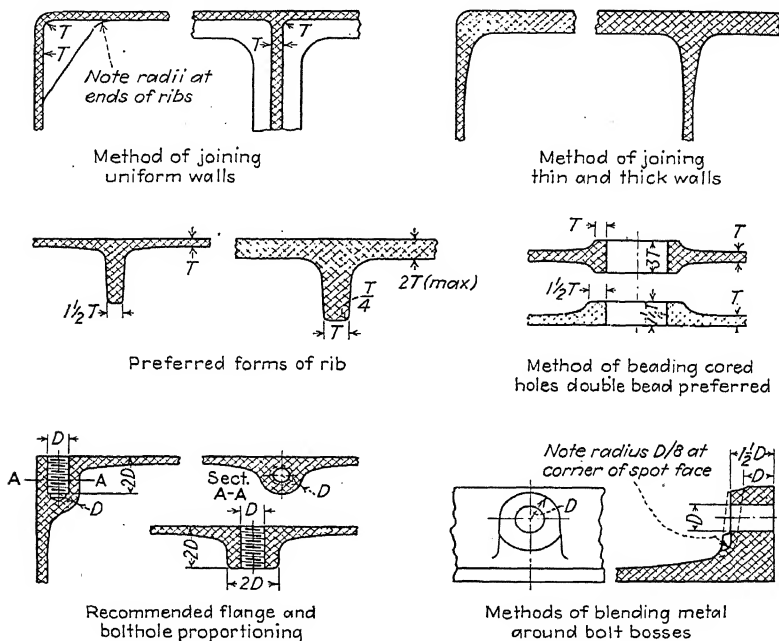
Aluminum Company of America recommendations on details of casting design.
